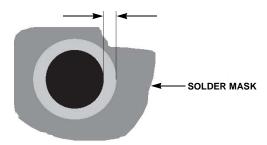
SOLDER MASK TO MOUNTING PAD CLEARANCE FOR NSMD PAD
